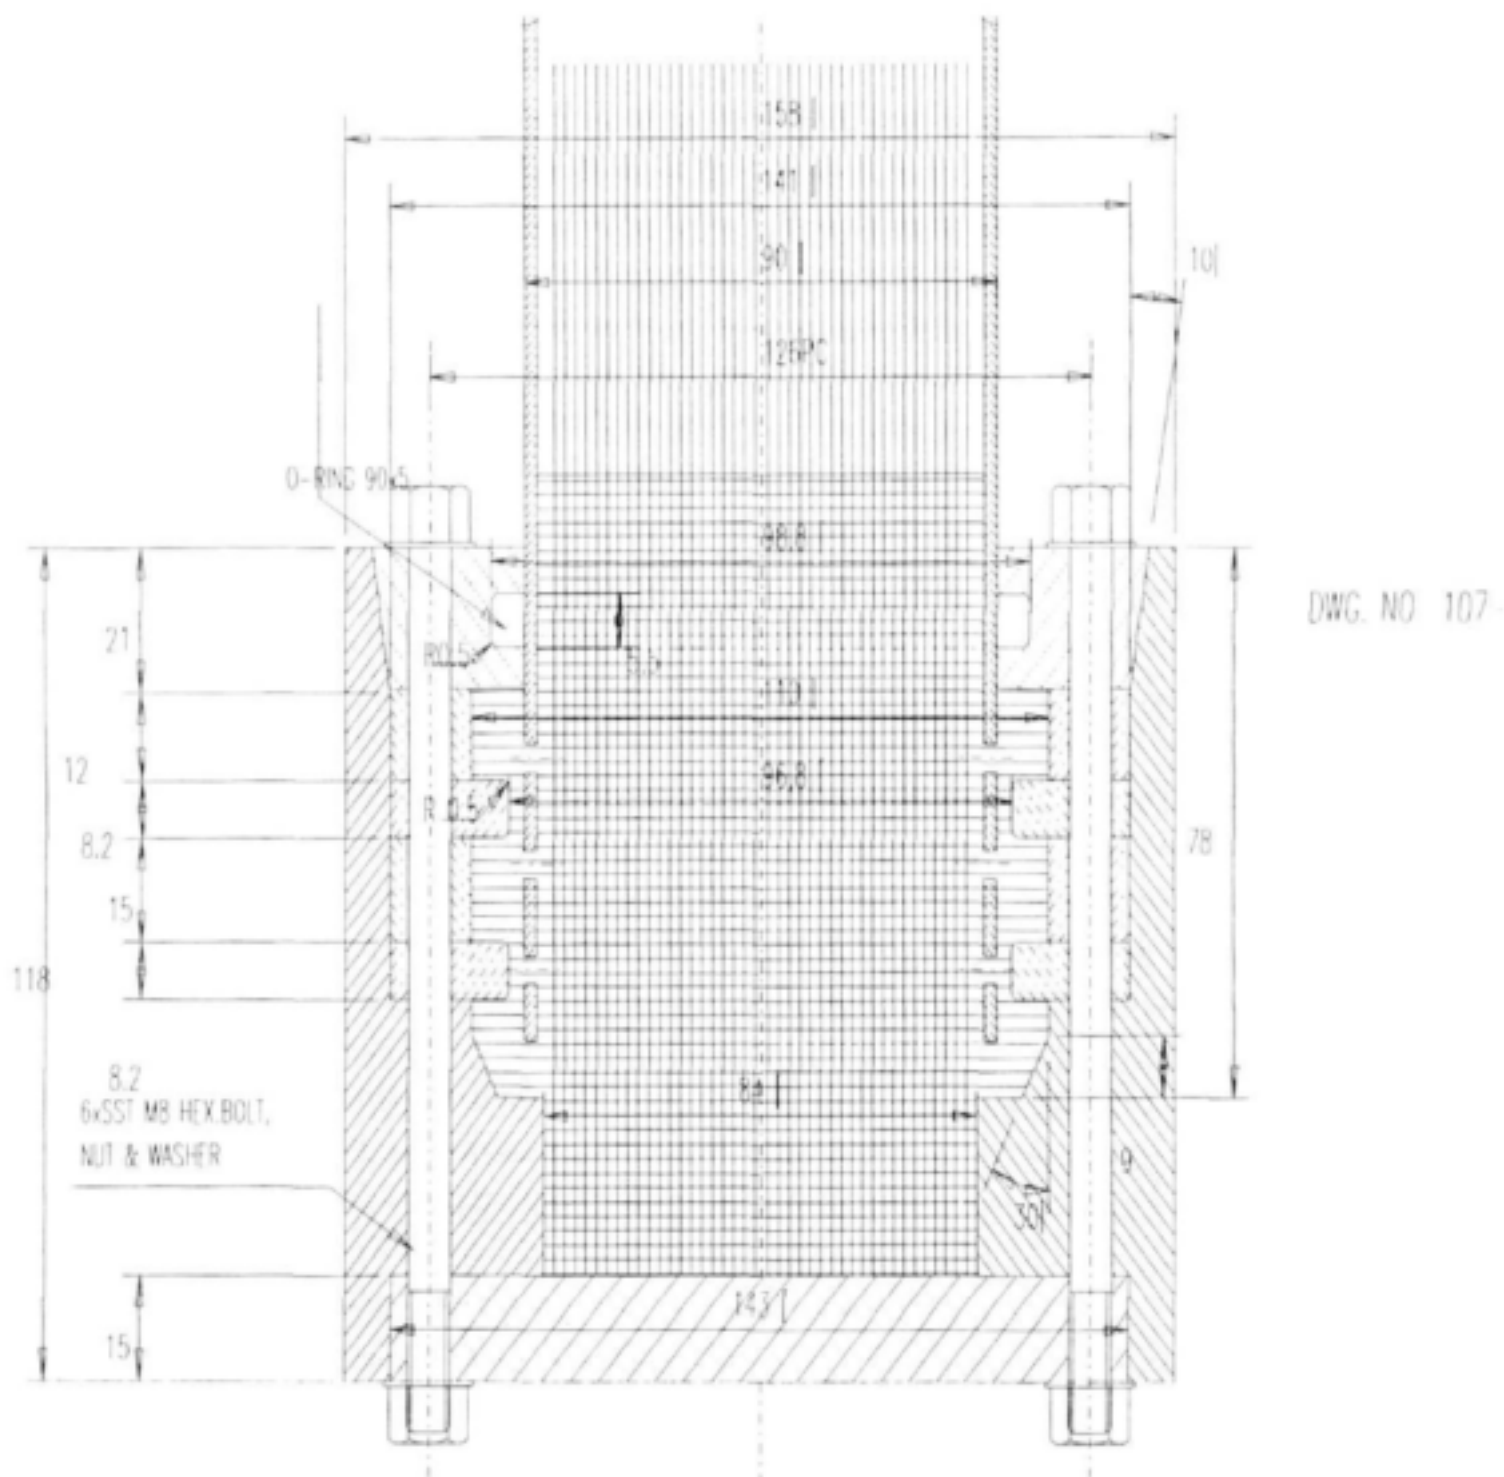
Detailed engineering drawing of the mould assembly with the capillary membrane module head shown in position
